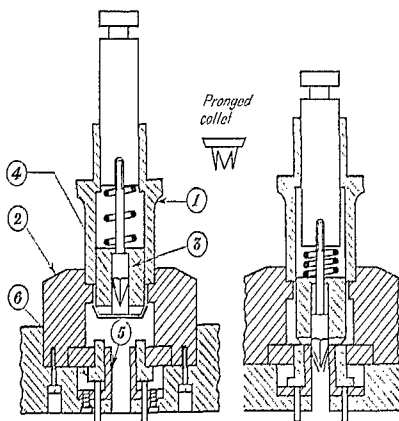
Combination die to blank and form pronged collet.⁸
